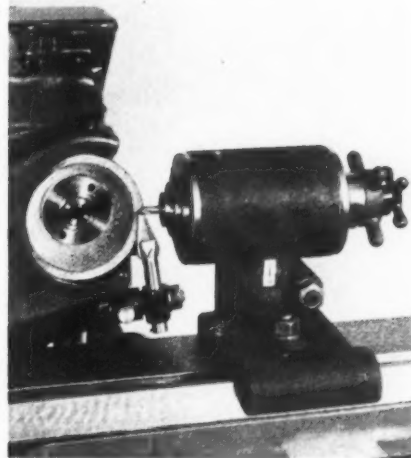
Brown & Sharpe No. 13 End-mill Grinding Attachment
